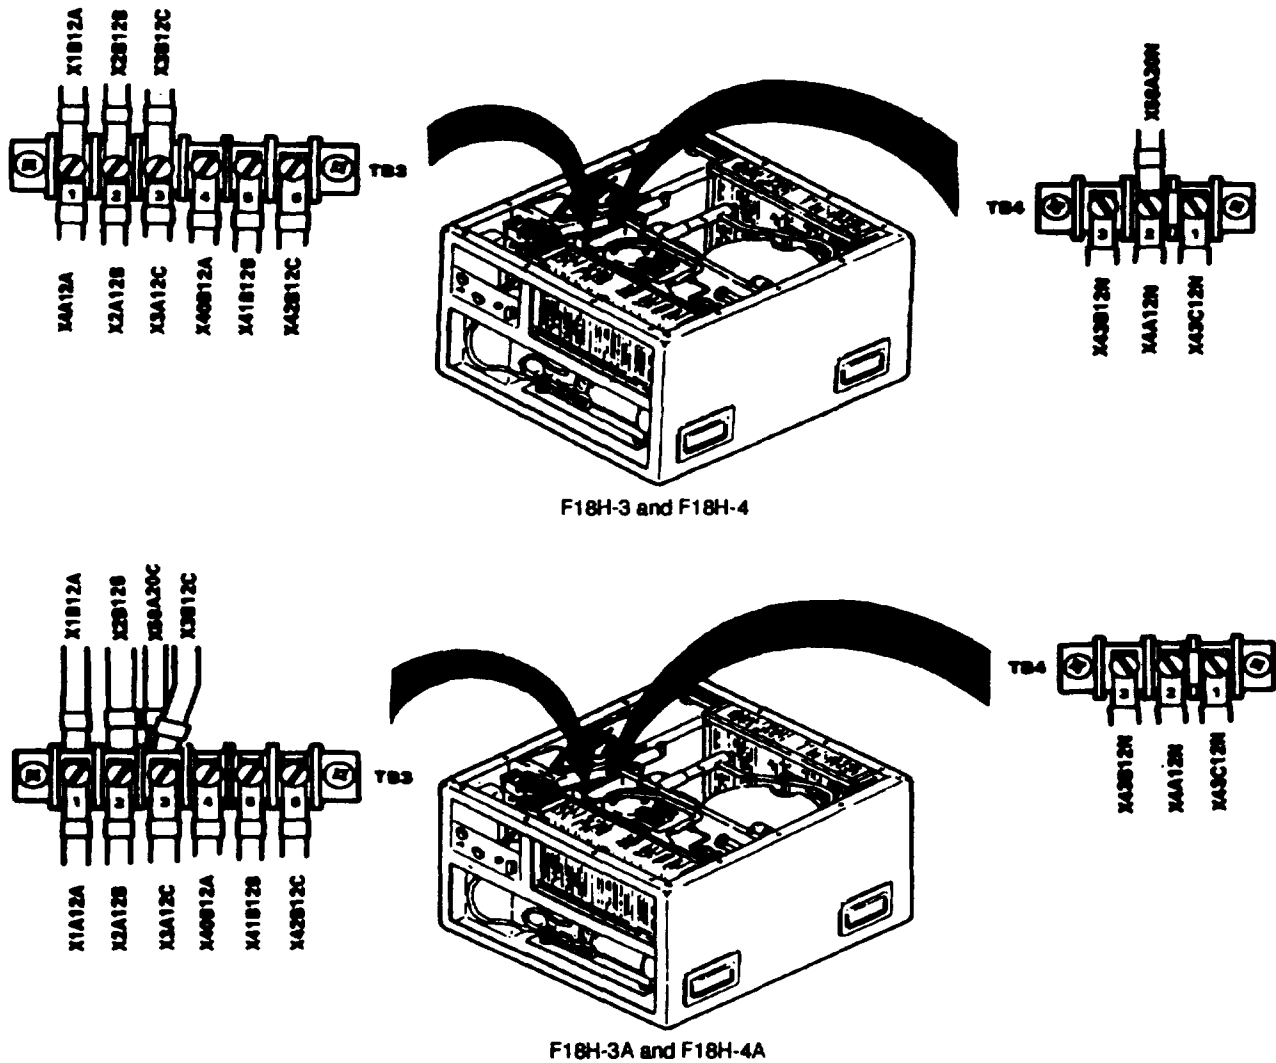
Connector J11 Wired at Terminal Board TB3 (Three Phase)
